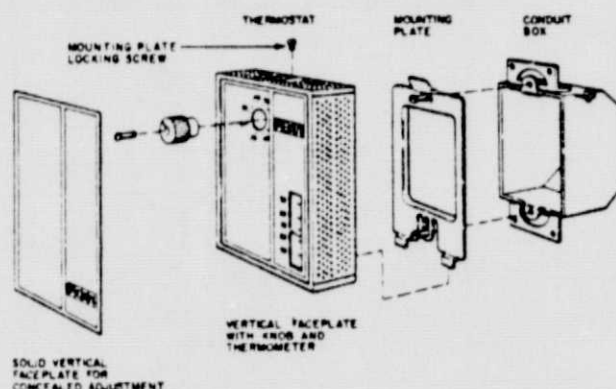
Line drawing illustrating method of mounting a vertical thermostat to outlet box. Also shown is a solid vertical faceplate for concealed adjustment when desired.
